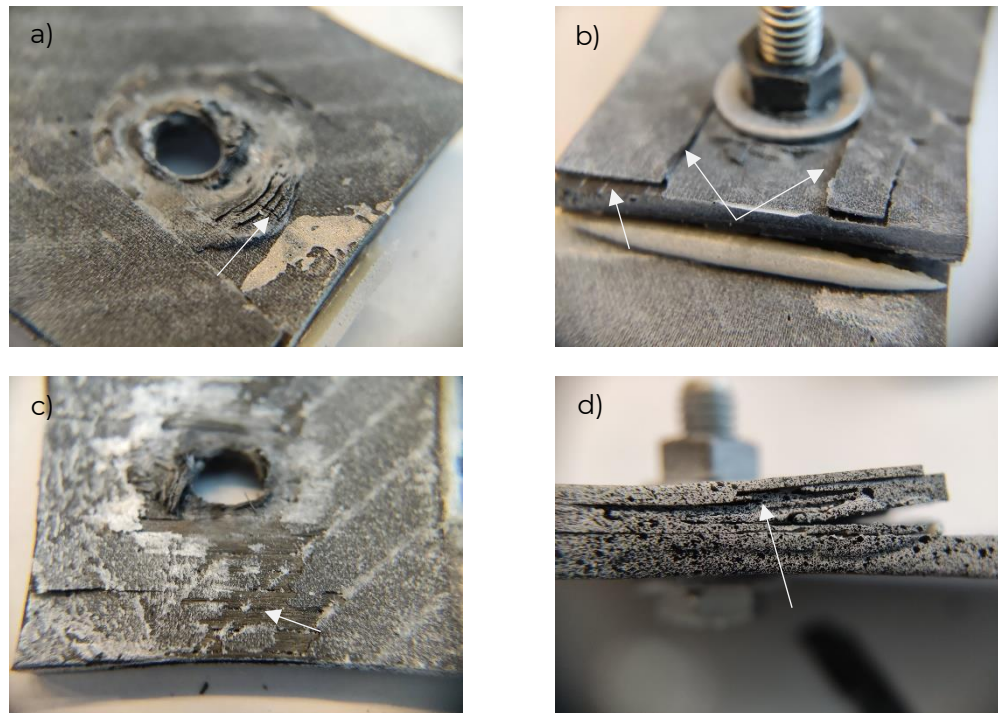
Specimens' failure surfaces: a) Bearing; b) Intra and interlaminar failure; c) Intralaminar failure and fibre breakage; d) Laminar failure
